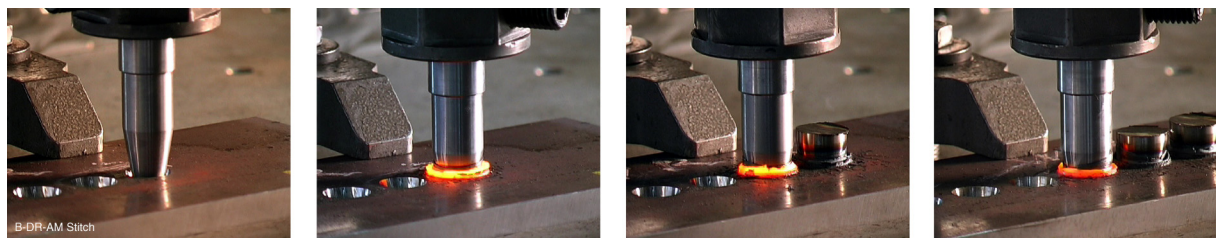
Stitch welding of a mild steel plate (taken during the production of stitch welded plates for Charpy impact testing).
